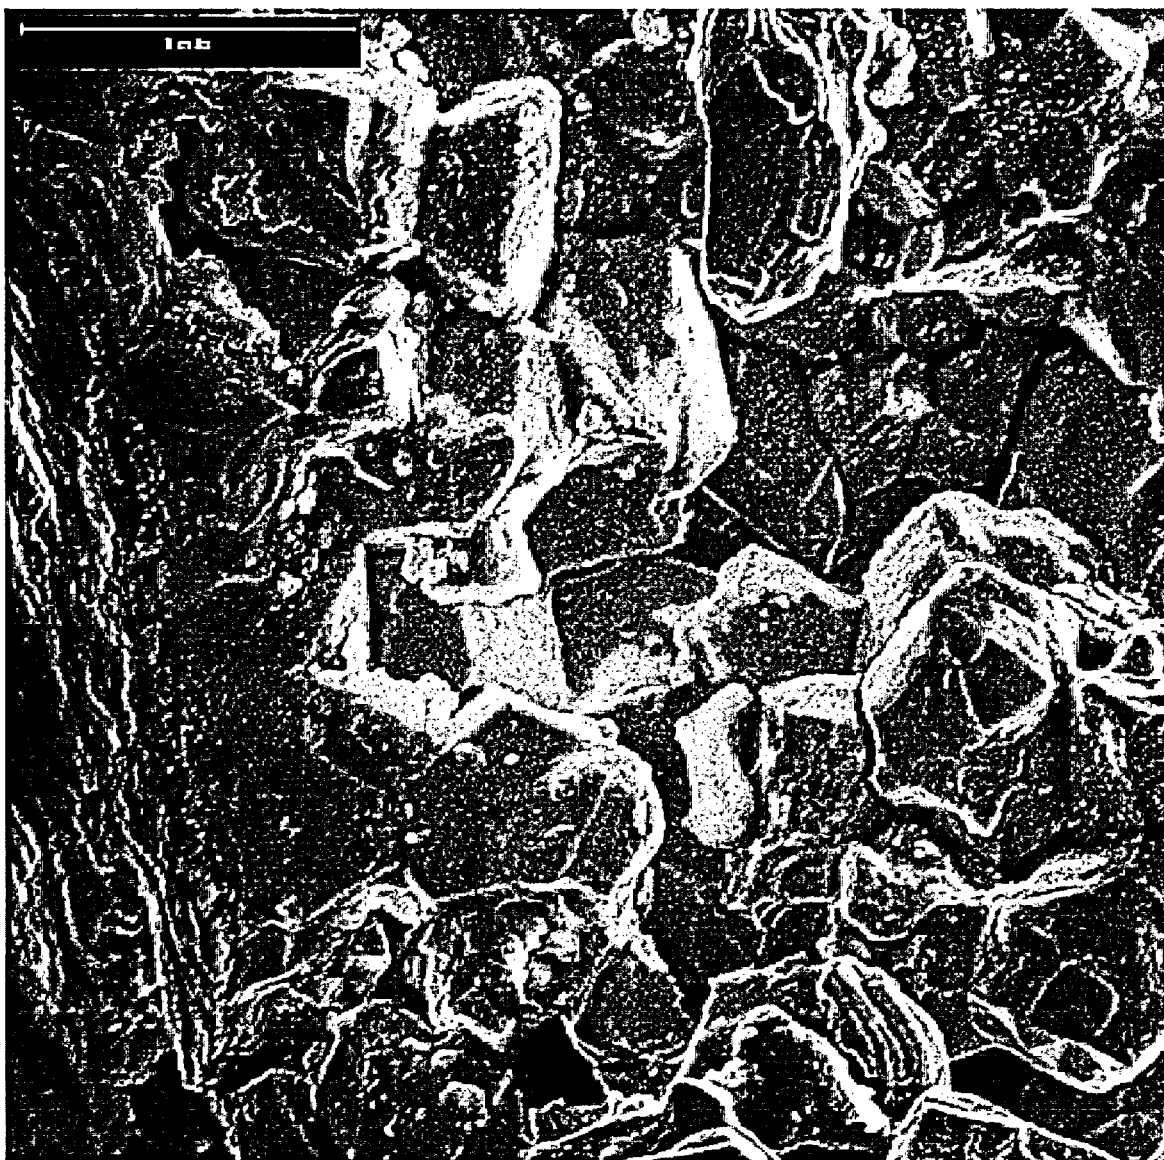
Close-Up of TSP1 Crack Mouth after Cleaning.
